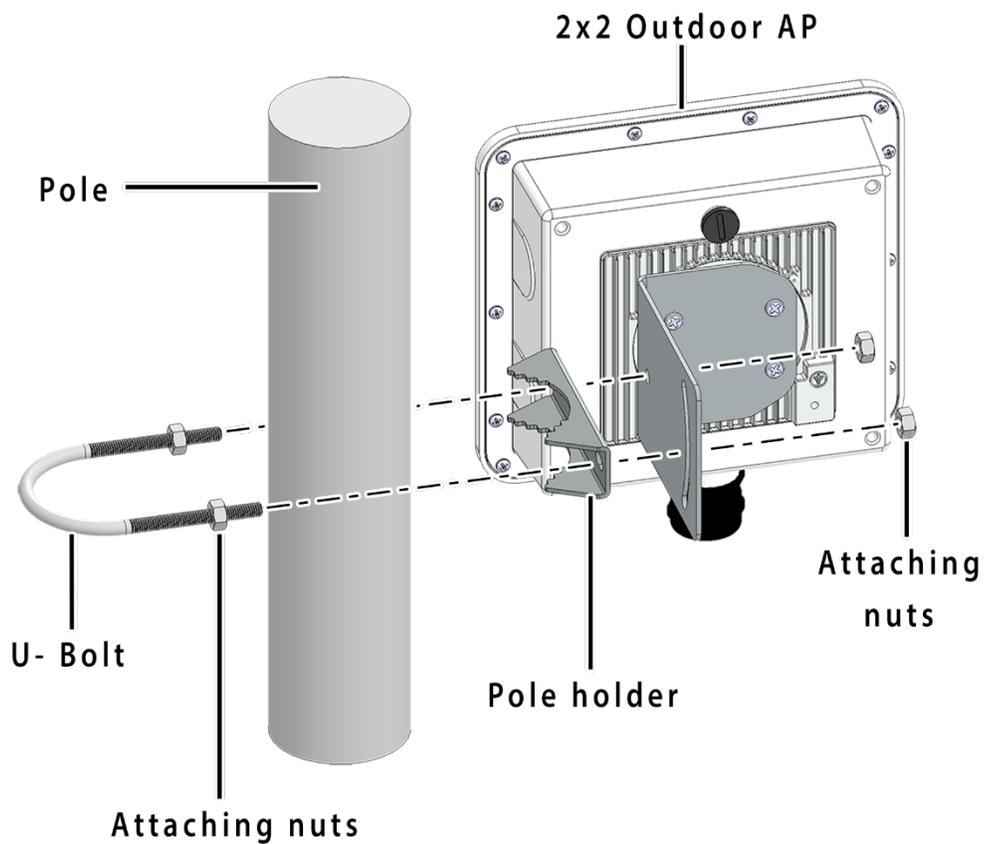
Overview of the 2x2 outdoor AP with pole and mounting bracket attaching parts
